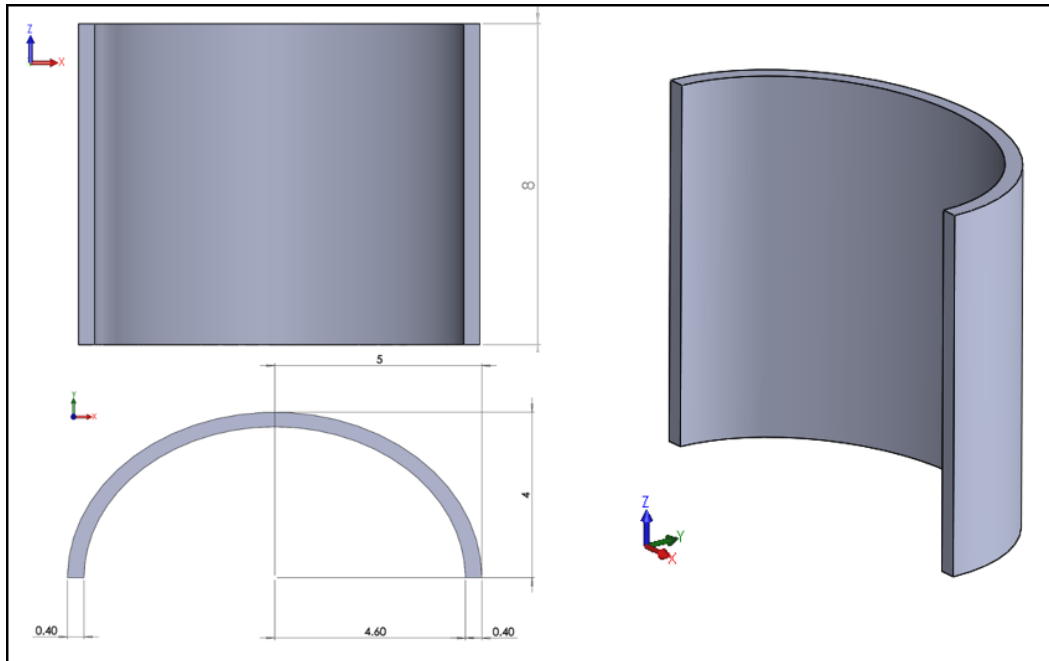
Front and top views (left) and isometric view (right) of the Scaled part. Dimensions in mm.
